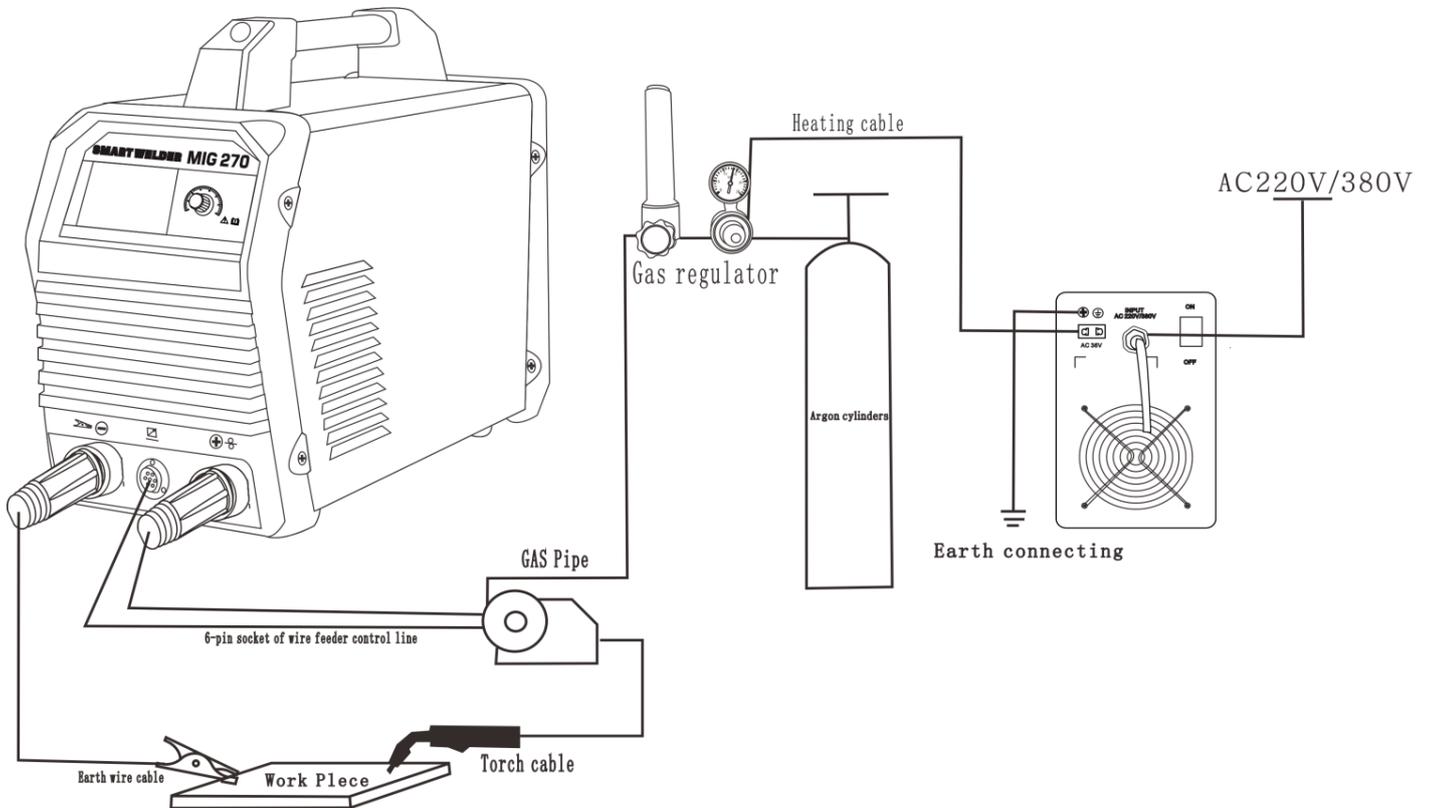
Installation of Instruction, using MIG270 as a installing example
